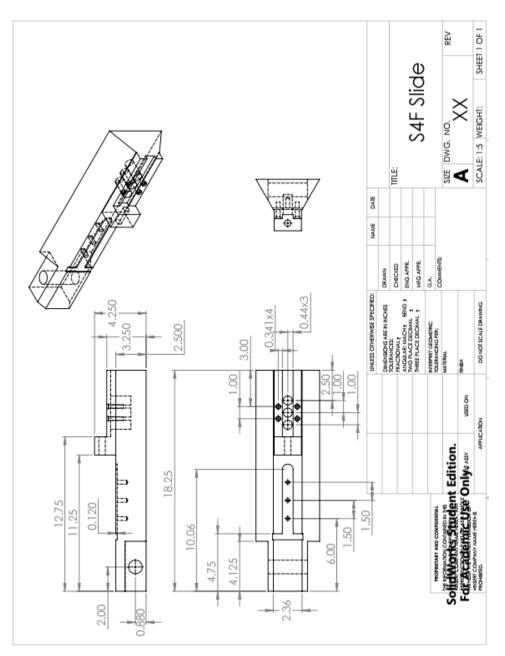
Dimensioned CAD drawing of an original S4F slide.
